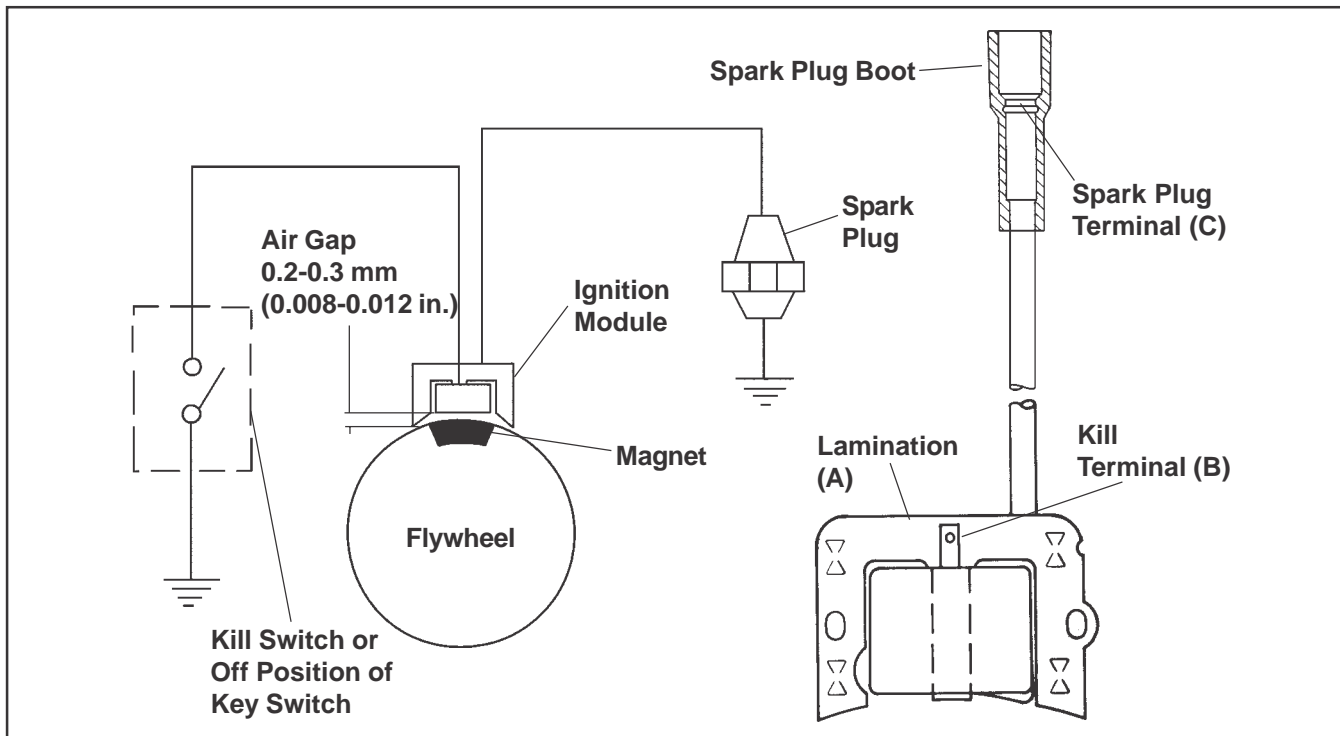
Electronic Magneto Ignition System, CH11-15 Engines.
